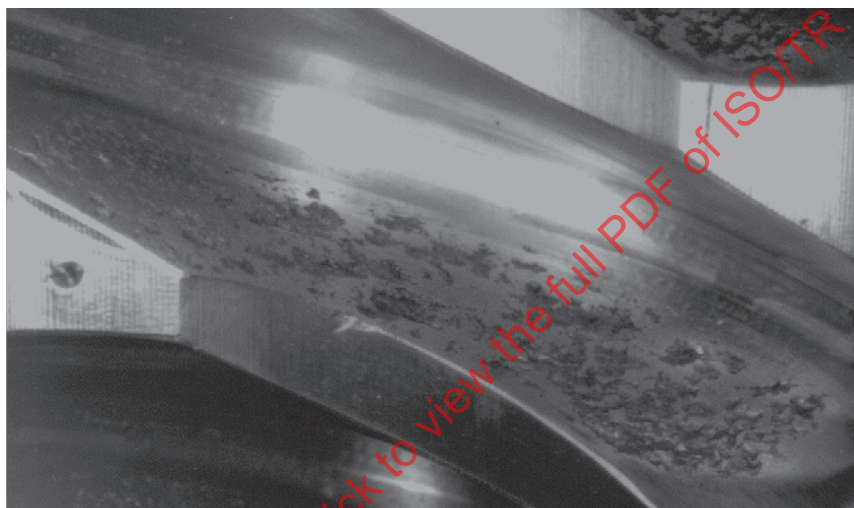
Macropitting in progress for a high lead angle worm gear set
